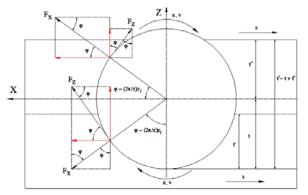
Cutting force's components in conventional asymmetrical face milling.
